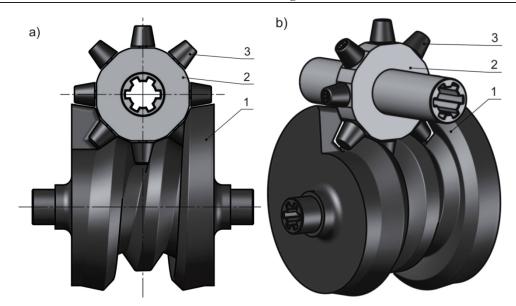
The worm and worm wheel of the globoidal worm gear, with the rotary teeth; a –worm wheel forefront view, b – isometric view; 1 – worm, 2 – worm wheel body, 3 – rotary tooth
